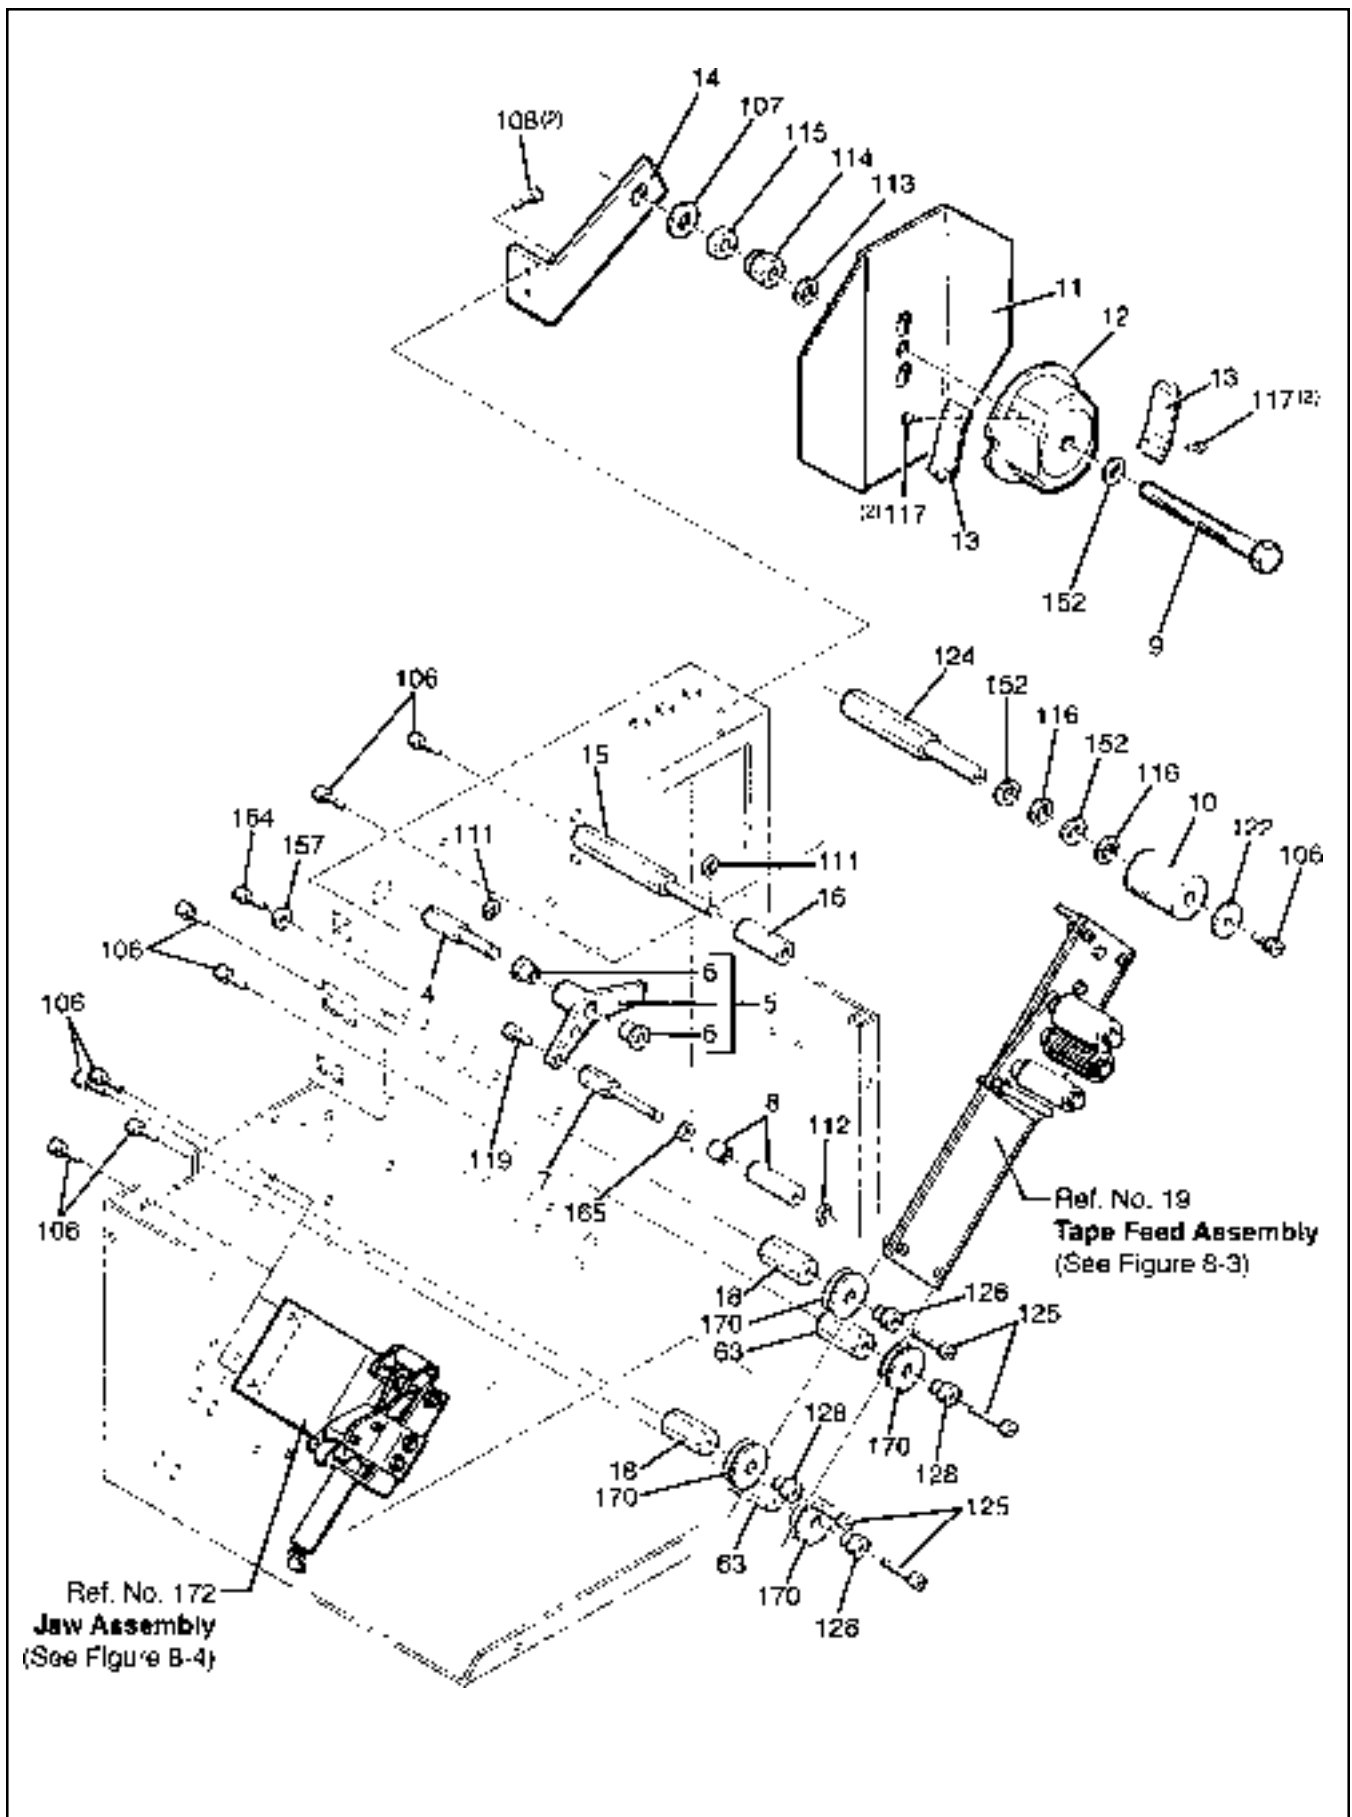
2 – Tape Drum, Tape Feed, Jaw Assemblies
